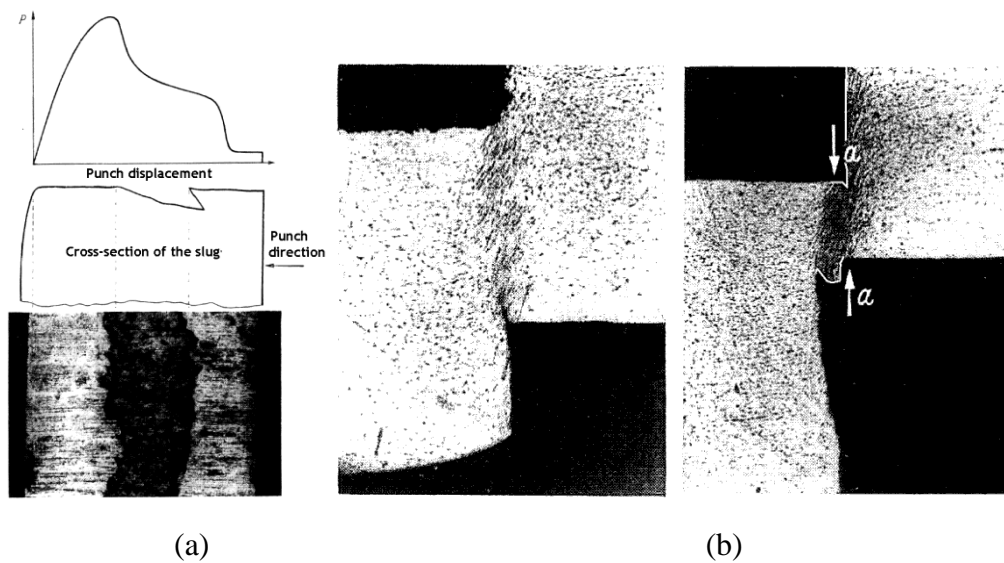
Shearing by crack growth from the cutting edges; (a) Load-stroke curve and appearance of sheared surfaces, (c) Cross-section through partially cut specimen at different stages of shearing.
